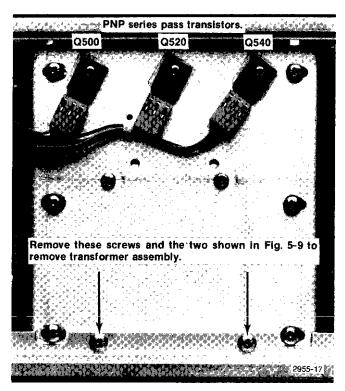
Location of PNP series pass transistors and partial transformer removal.
